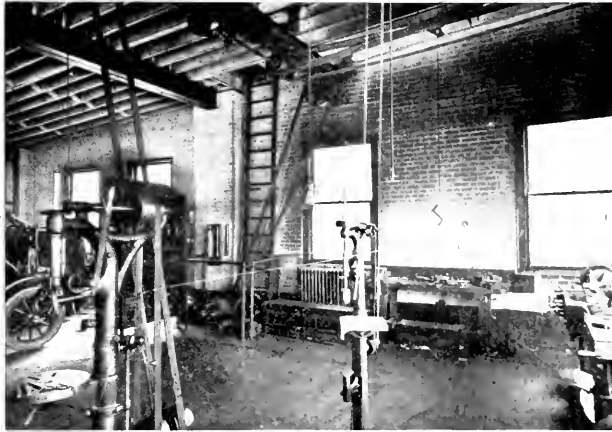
DIRECT-CURRENT MOTOR DRIVING GROUP OF MACHINE TOOLS
